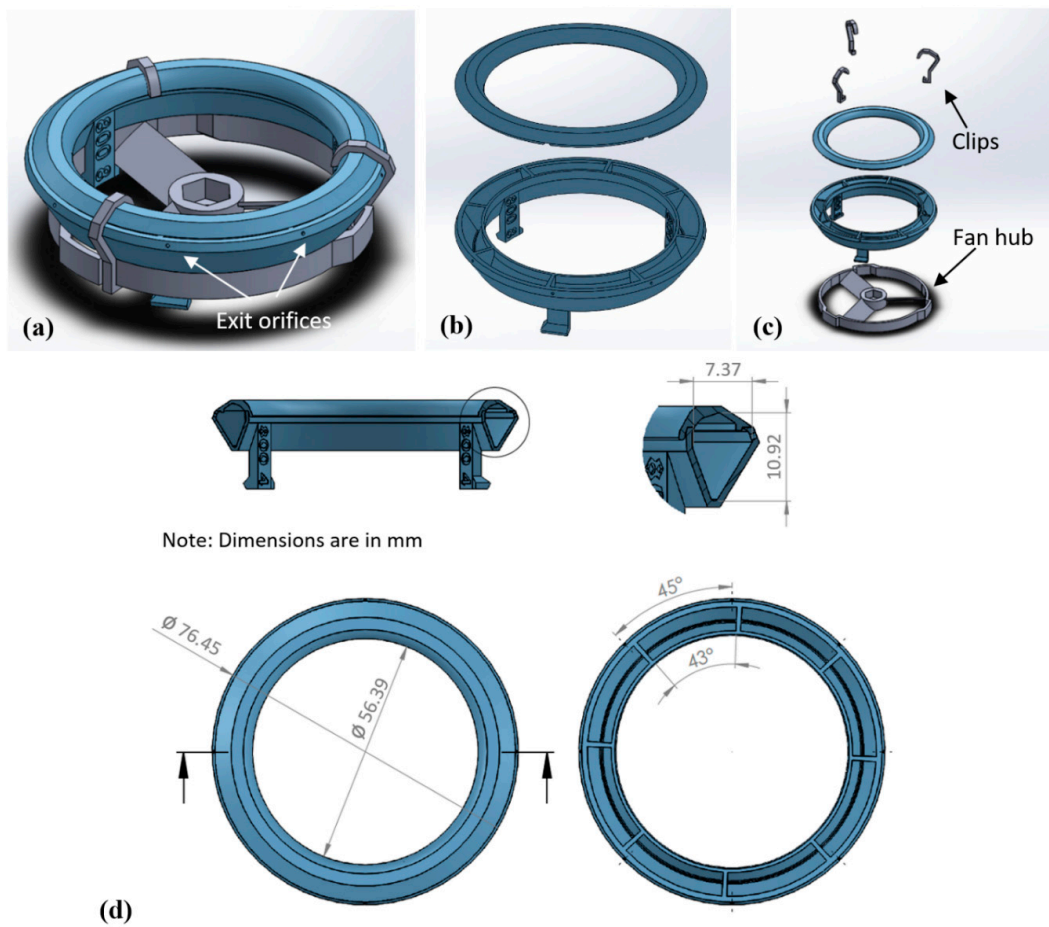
Spinneret design, showing: (a) the spinneret assembly; (b) clamshell design; (c) spinneret assembly exploded view; and (d) clamshell design in detail, including dimensions.
